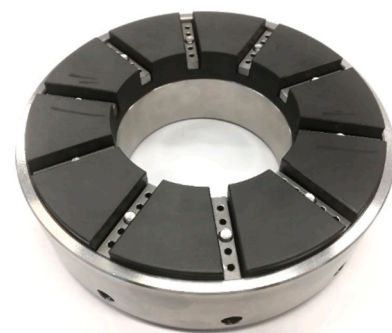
Prototype thrust bearing with sliding pads made of polymer material.
